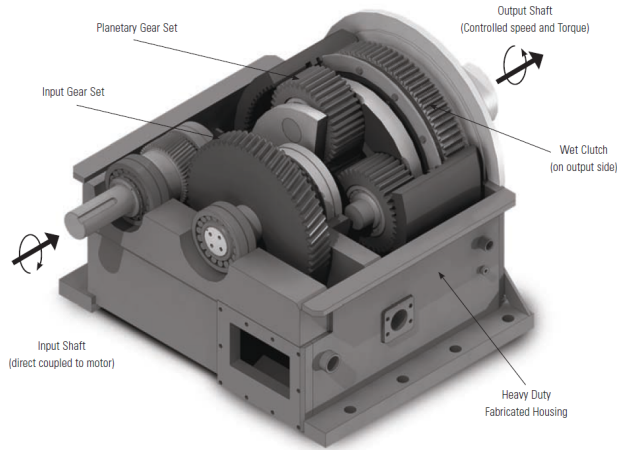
Closer look at the CST gearbox, ABB/Baldor-Dodge
